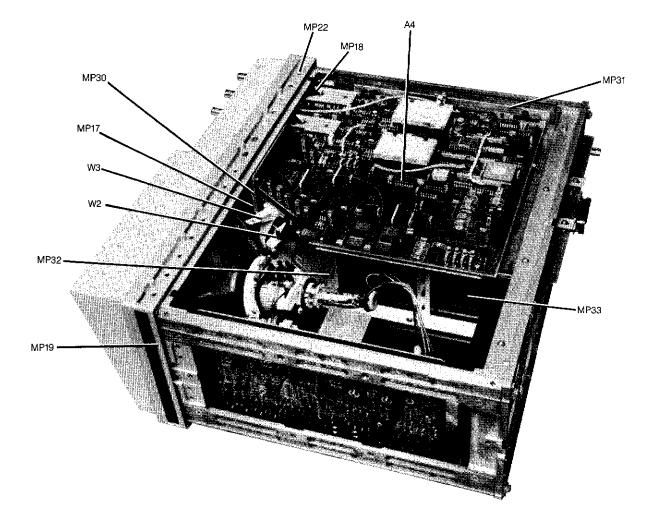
Mainframe Parts Location (Sheet 3 of 3)
